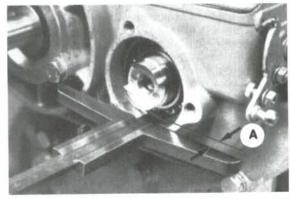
To determine camshaft end play, measure distance "A" from surface of front cover to race of bearing. Refer to text.
